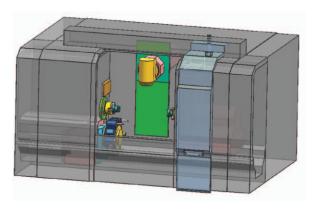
These complex mill-turns can have a lower turret and an upper turret or a B-axis head which can handle turning and milling operations on both the main and an optional sub spindle.
